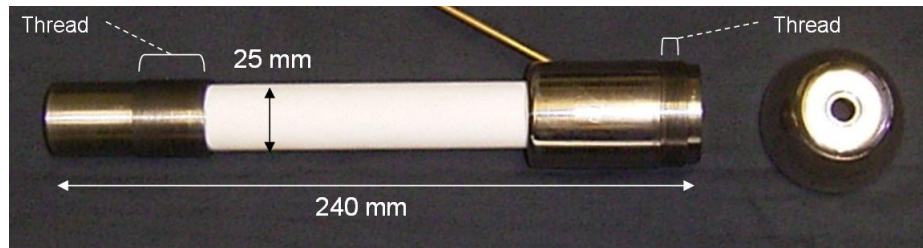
Macor tube with glued threaded end caps and Rogowski head.
